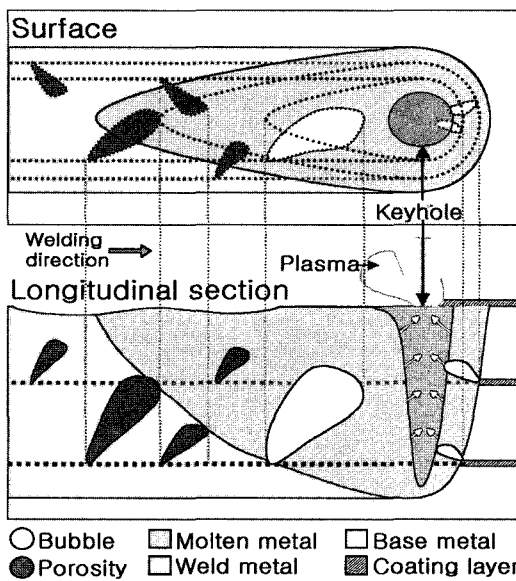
Porosity formation mechanism in lap welding of primer-coated steel
